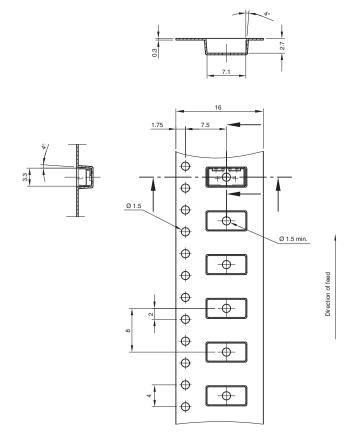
Issue: 1: 23.03.09 21785
